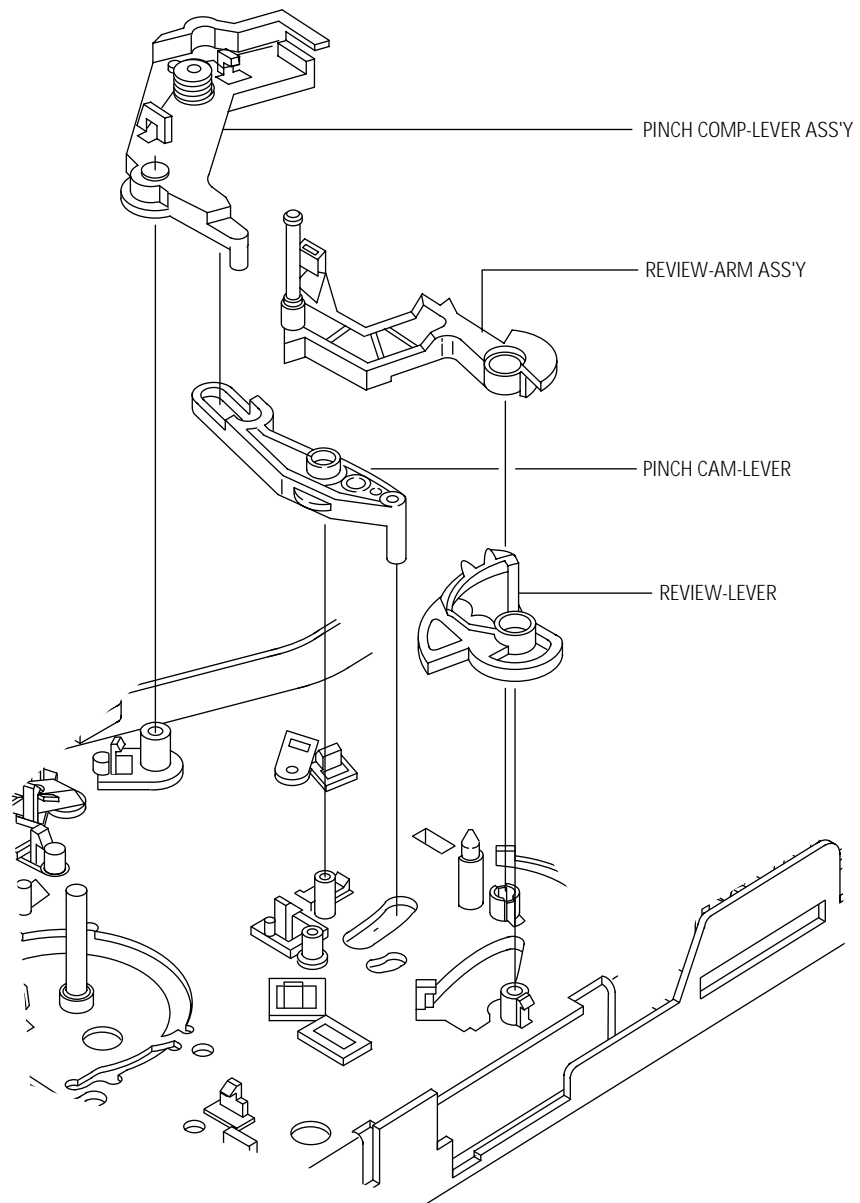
Exploded View of Pinch Lever Comp Ass'y, Pinch Cam Lever, Arm Review Ass'y and Lever Review Ass'y
